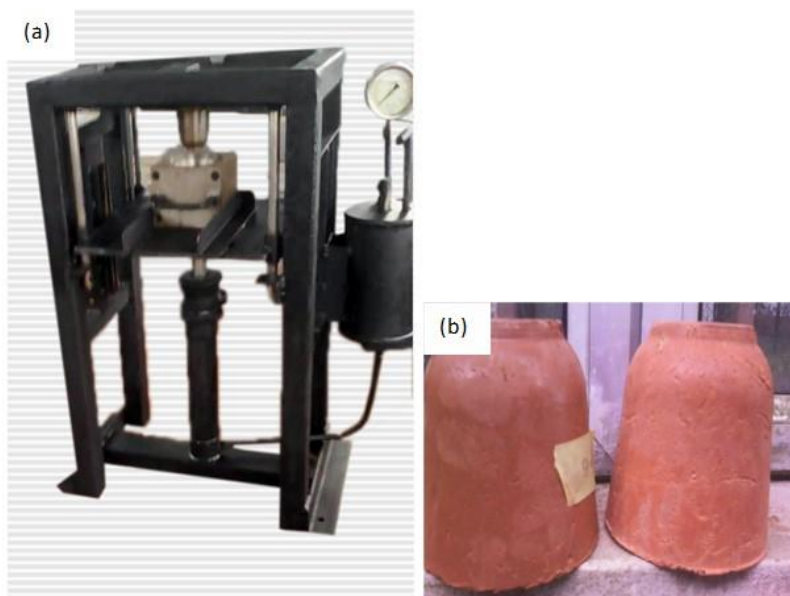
(a) fabricated hydraulic press machine, (b) crucibles.
